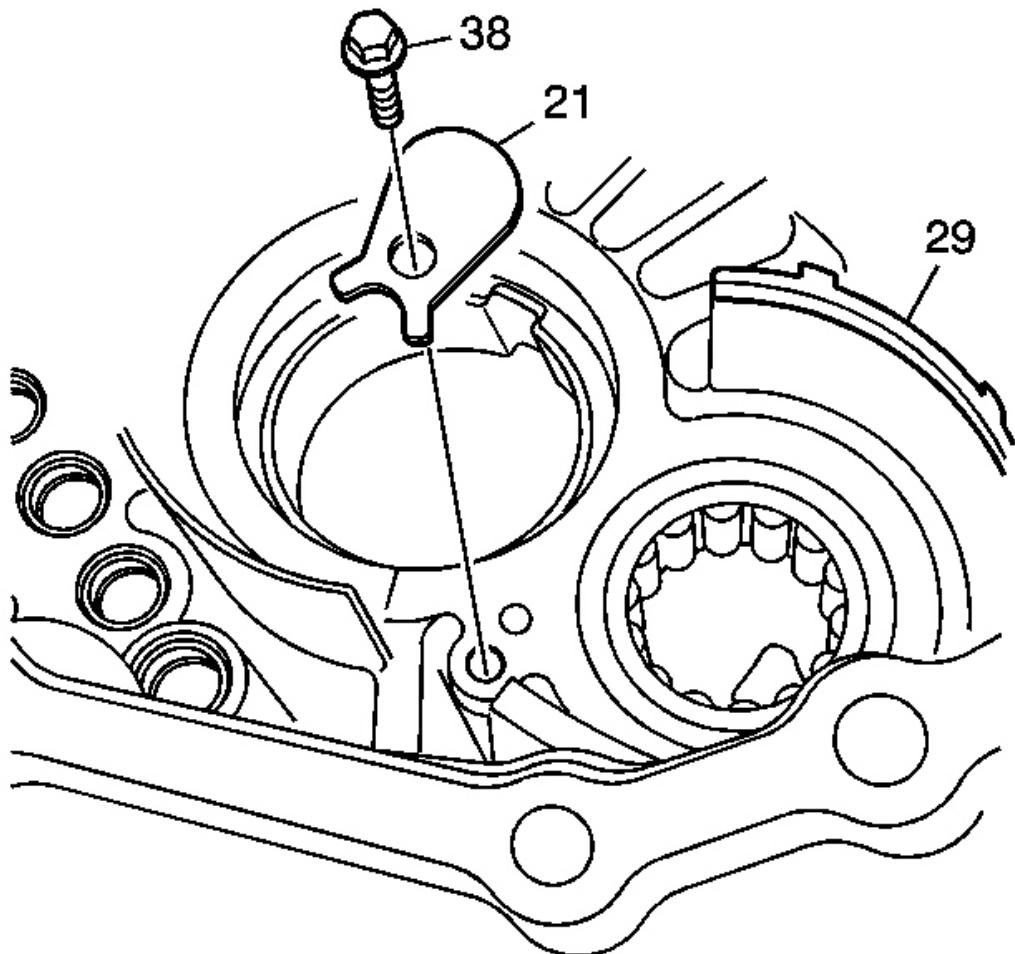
View Of Bearing Retainer, Bolt & Gasket
